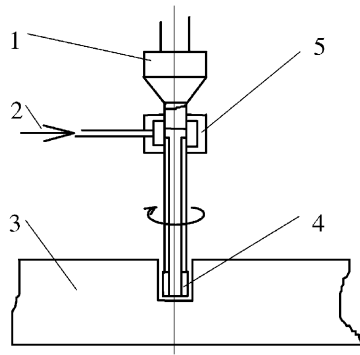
Schematic diagram of the diamond tool drilling process: (1) chuck, (2) water, (3) workpiece, (4) tool, (5) water jacket.
